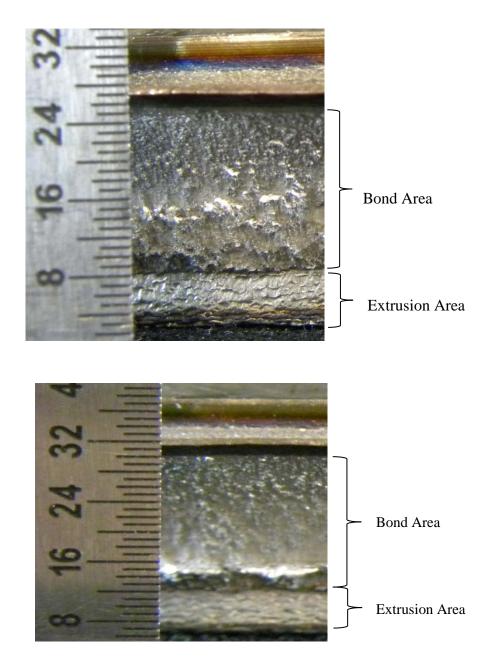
Showing fracture surface and method to determine the bond length for a burst tested sample.
